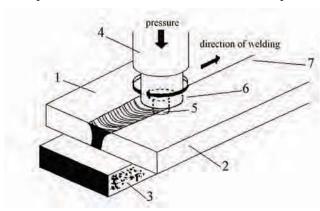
Principle of the FSW: 1 and 2-weld pieces 3-postolje 4-shoulder 5-probe 6-shoulder tip 7-weld joint line
